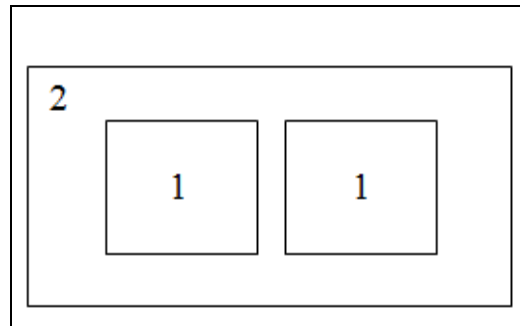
Identification of moulding zone (1) and adjustment zone (2) in a mould
